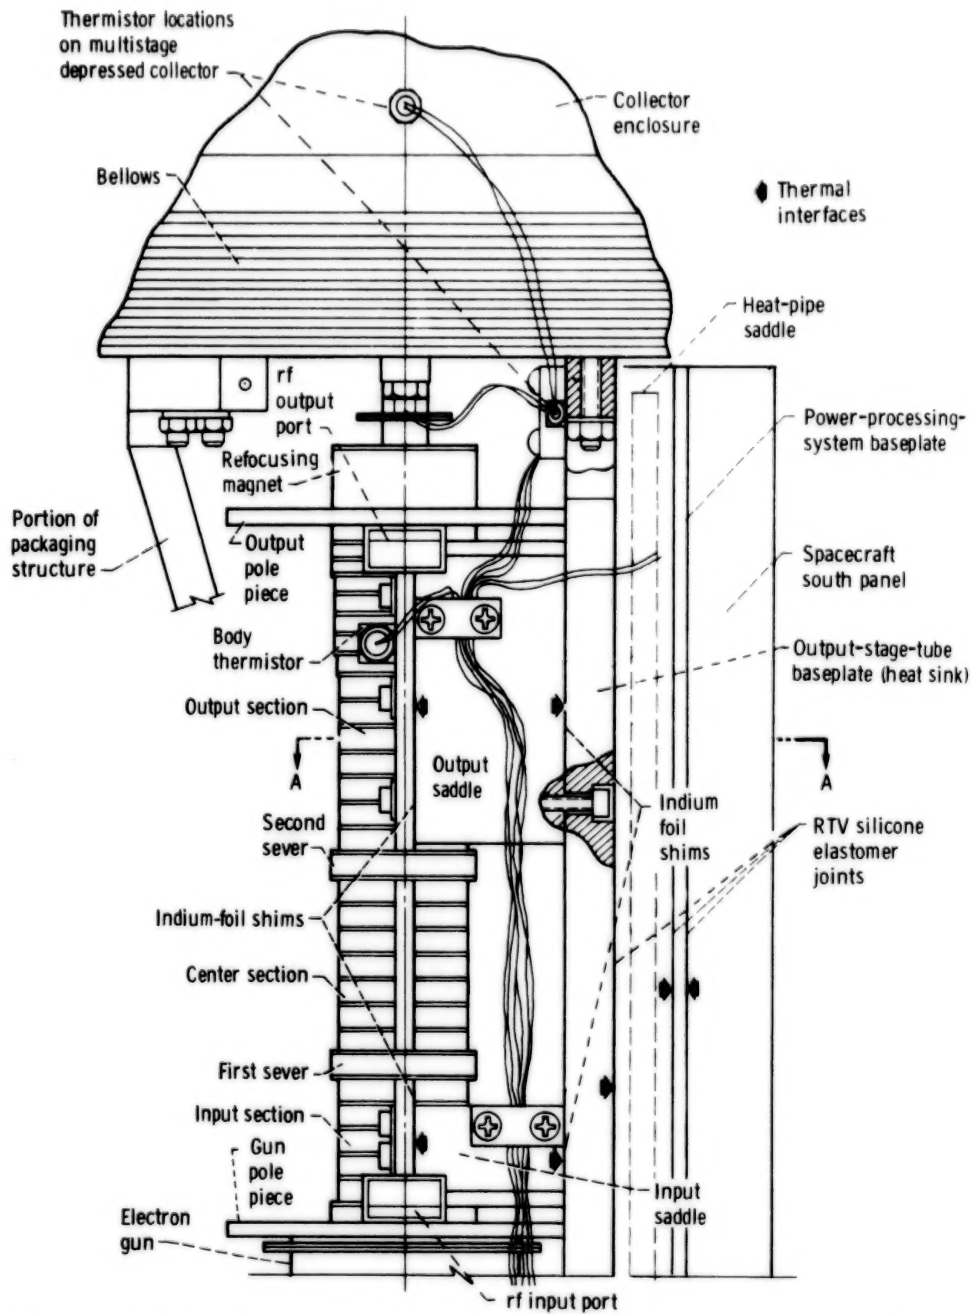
Side view of CTS traveling-wave tube, showing heat-pipe saddle and spacecraft mounting details.
